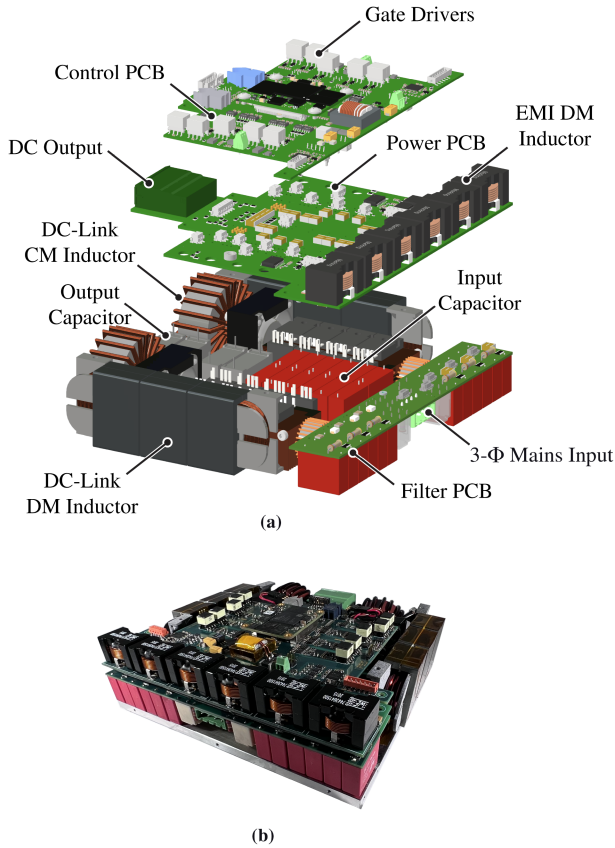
(a) Exploded view of the 10 kW 3- Φ bB current DC-link PFC rectifier hardware demonstrator (see Fig. 2 for the schematics and Table I for key components). (b) Photograph of the realized prototype. The dimensions are $184 \times 172 \times 49 \text{ mm}^3$ ($9.8 \times 5.1 \times 1.9 \text{ in}^3$), resulting in a power density of 6.4 kW/dm^3 (107.5 W/in^3). Operating from the 400 V 3- Φ mains and employing 1200 V SiC (CSR-stage) and 900 V SiC (DC/DC-stage) MOSFETs, a wide-output-voltage range of 200–1000 V is covered.
